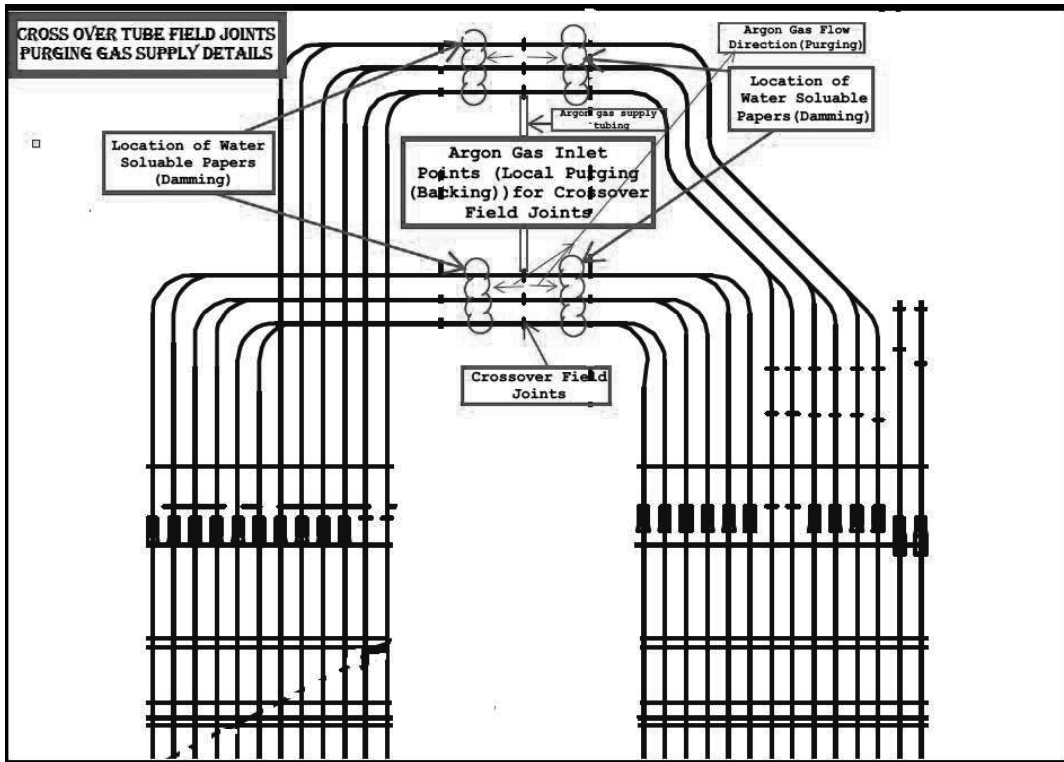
Purging Arrangement for Cross Over Tube Field Joints
